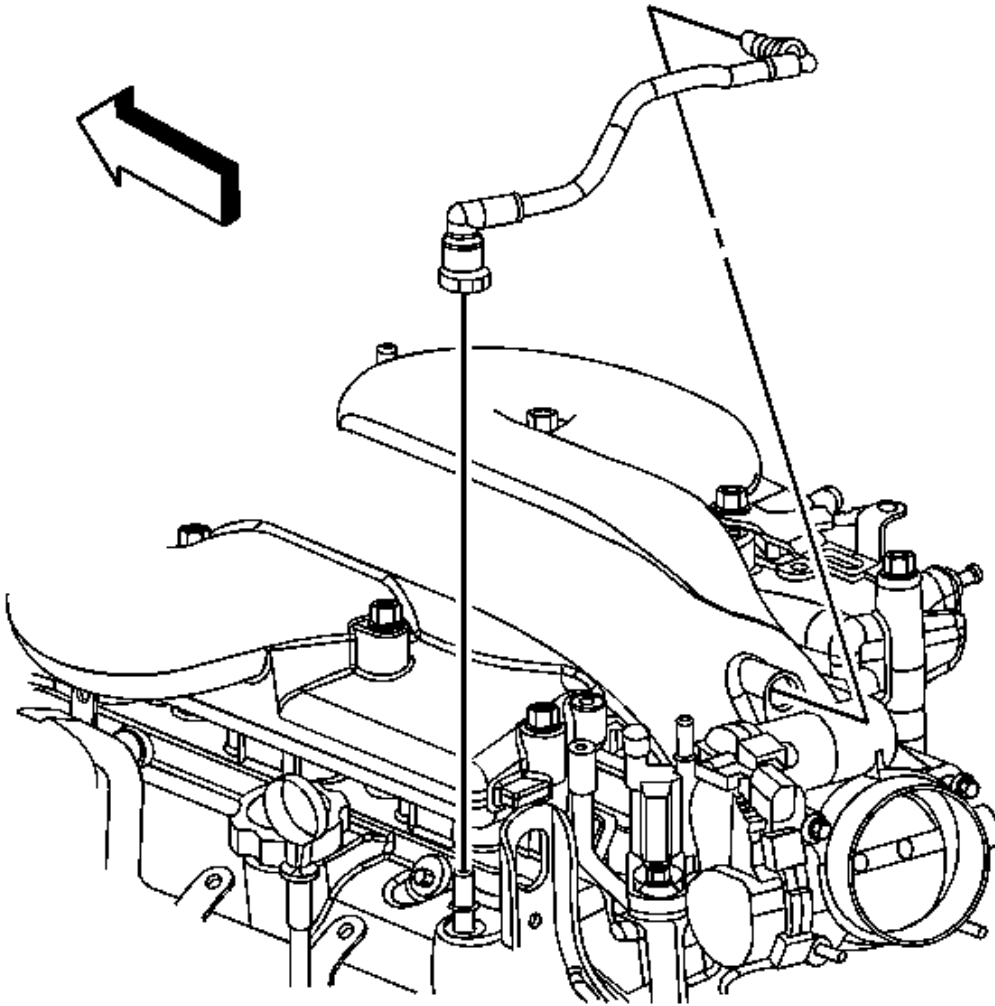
Positive Crankcase Ventilation (PCV) Foul Air Tube
